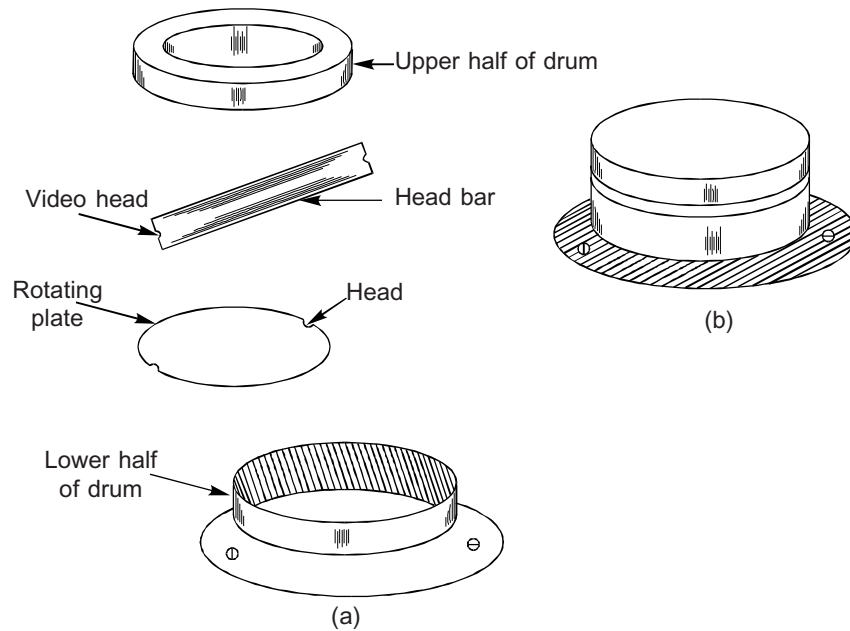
Head Drum Assembly; (a) Exploded View (b) Assembled View
